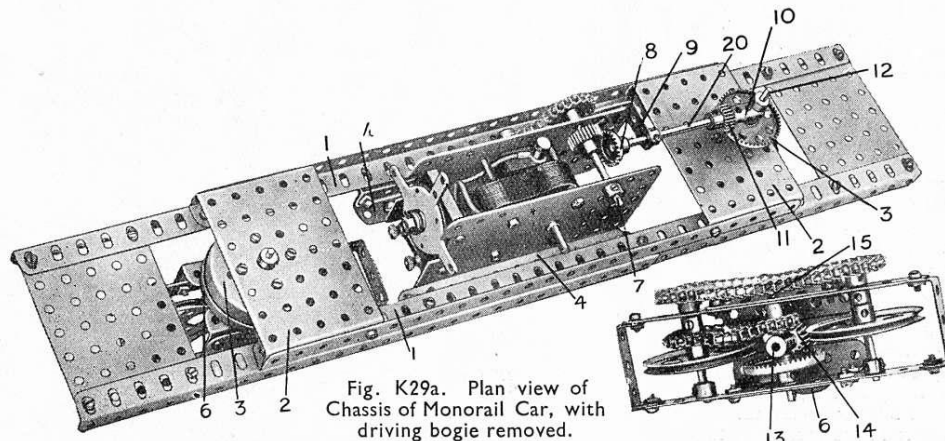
Plan view of Chassis of Monorail Car, with driving bogie removed.
